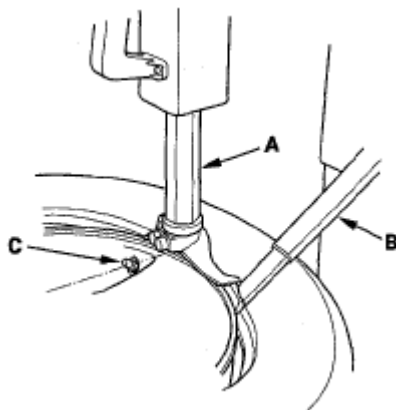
Positioning Wheel On Tire Machine And Tire Iron
